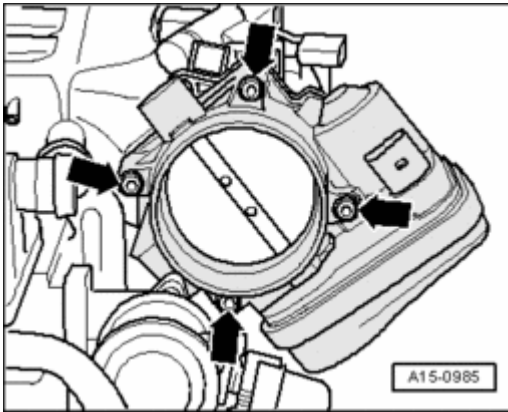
Removing Bolts And Throttle Valve Control Module -J338- From Intake Manifold
